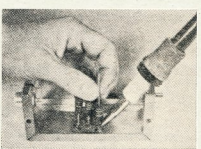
Method used to solder the resistors to the bottom plate. The solderer the resistor leads the better.
